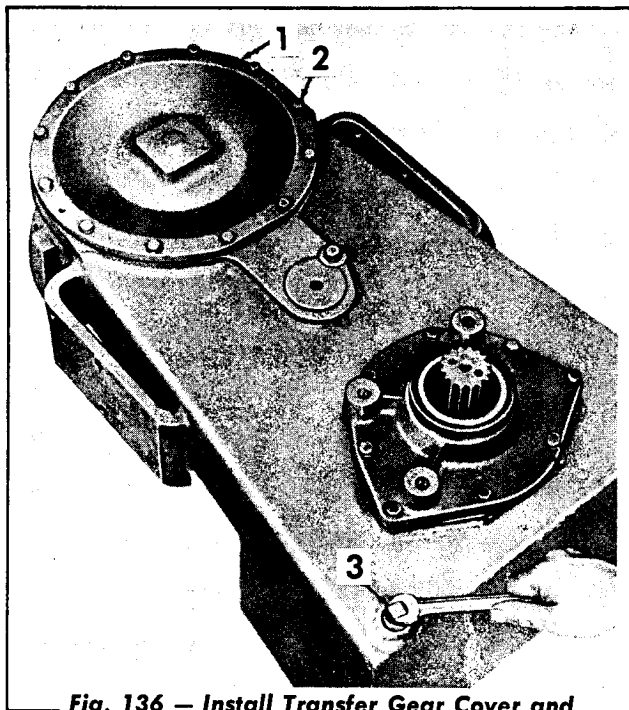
Install Transfer Gear Cover and Oil Drain Plug
